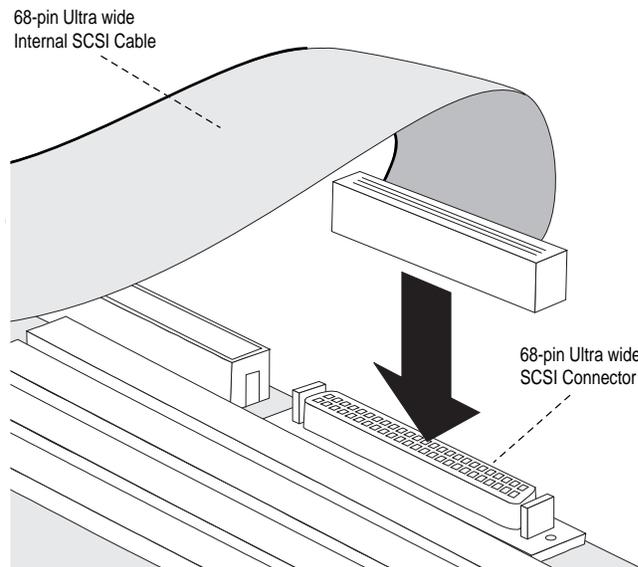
Attaching 68-pin Internal Ribbon Cable
